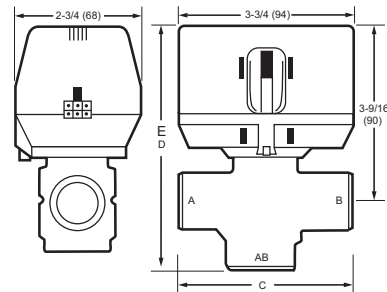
3-Way nominal dimensions in inches and millimeters.
